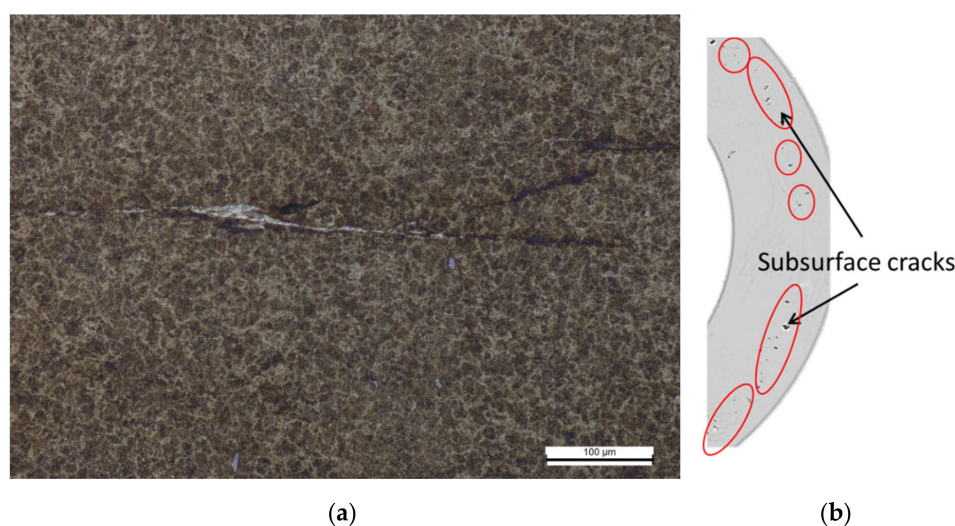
Bearing washer TB 60-100, (a) Cross-section on bearing washer (TB 60-100) with subsurface WEC, (b) Ultrasonic image of subsurface cracks (TB 60-100).
